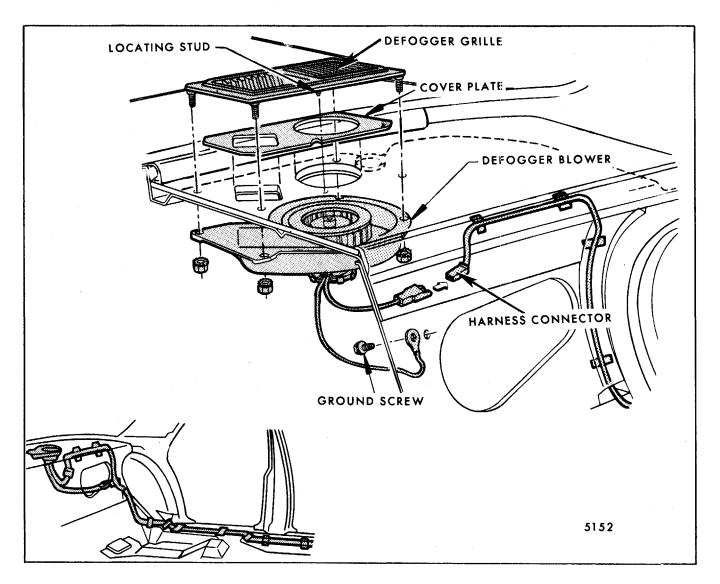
Typical Defogger Blower Installation - B Style Shown
